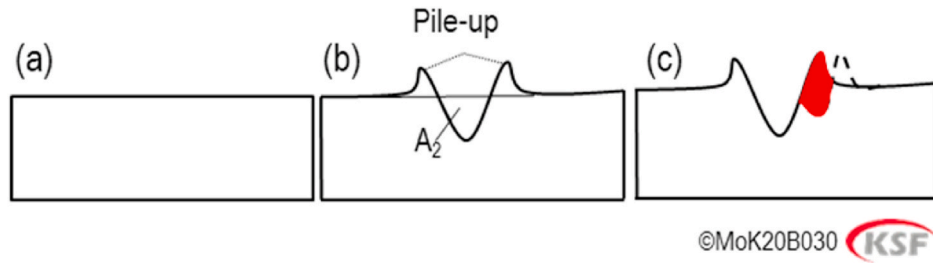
Schematic of cutting path section a) material/blank prior to the grinding, b) after the first cut, and c) removed material by the following grain.
